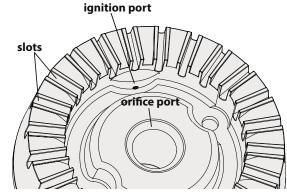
Cooktop burner head (All burners except Double ring burner)
